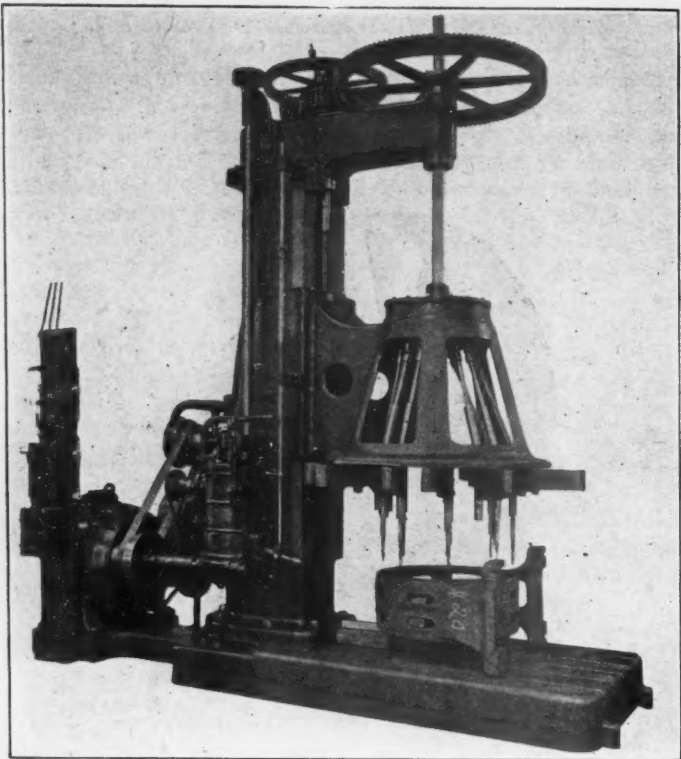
MULTIPLE SPINDLE DRILL.—BAUSH MACHINE TOOL COMPANY.
